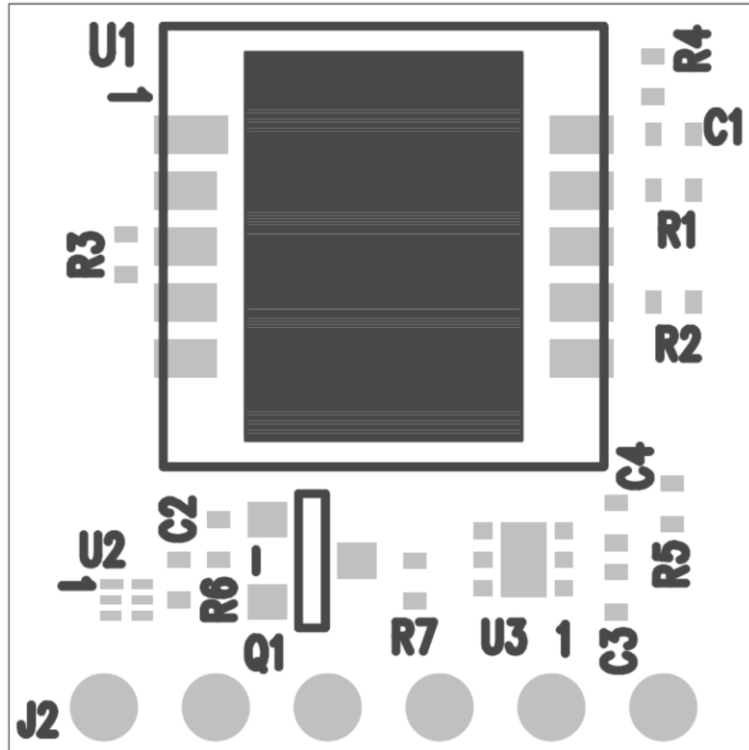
INTERFACE ADAPTOR BOARD COMPONENTS PLACEMENT
